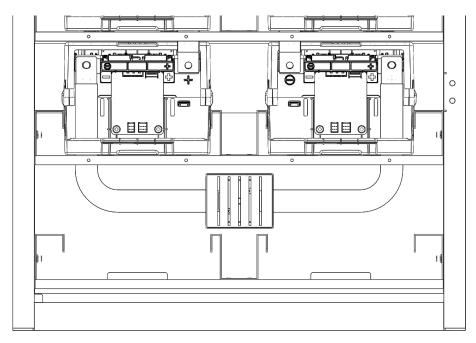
Rack Fuse Cover (Fully Assembled Front View)
